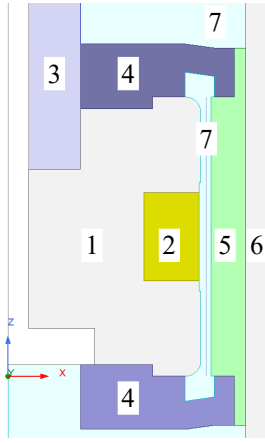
Finite-element model of the MR actuator (Ansys Maxwell 2021 R2); 1 – solenoid core, 2 – coil, 3 – rod, 4 – non-magnetic plates, 5 – sleeve, 6 – cylinder, 7 – MRF
